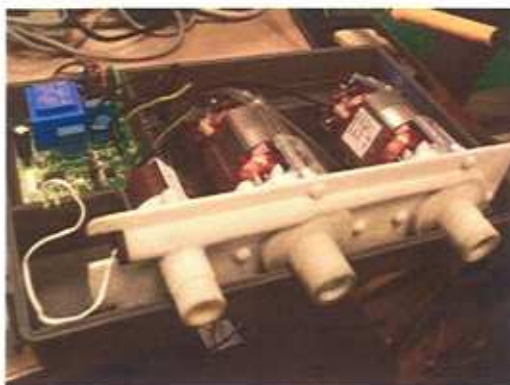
SLS manufactured LP Hydroplane on test and SLA built new pump configuration
